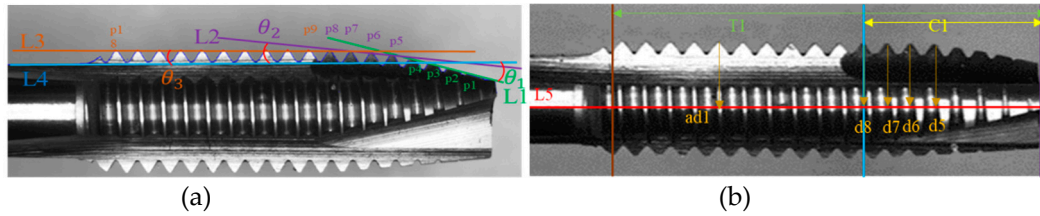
Tap side detection target; a) Illustrations of the guide cone angle, cutting cone angle and flute cone angle; b) Illustrations of tooth peak height and tooth length.
